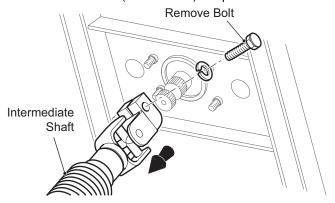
Disconnect Intermediate Shaft to Center Steering Wheel
